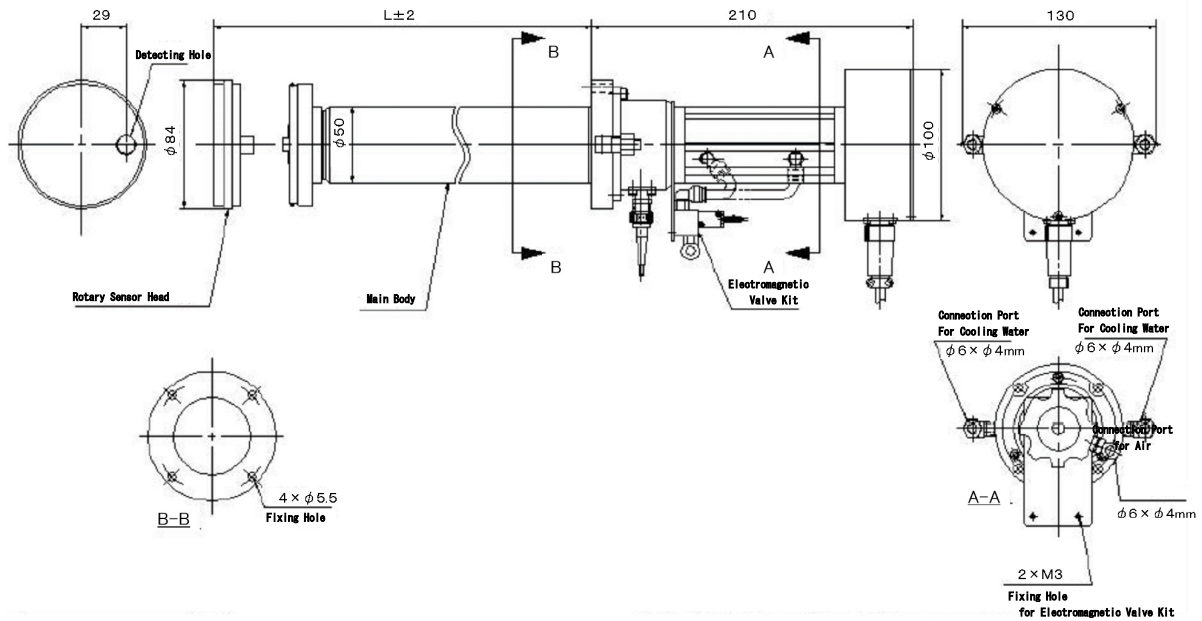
Rotary Sensor with Rotary Sensor Head 180 and Electromagnetic Valve Kit
